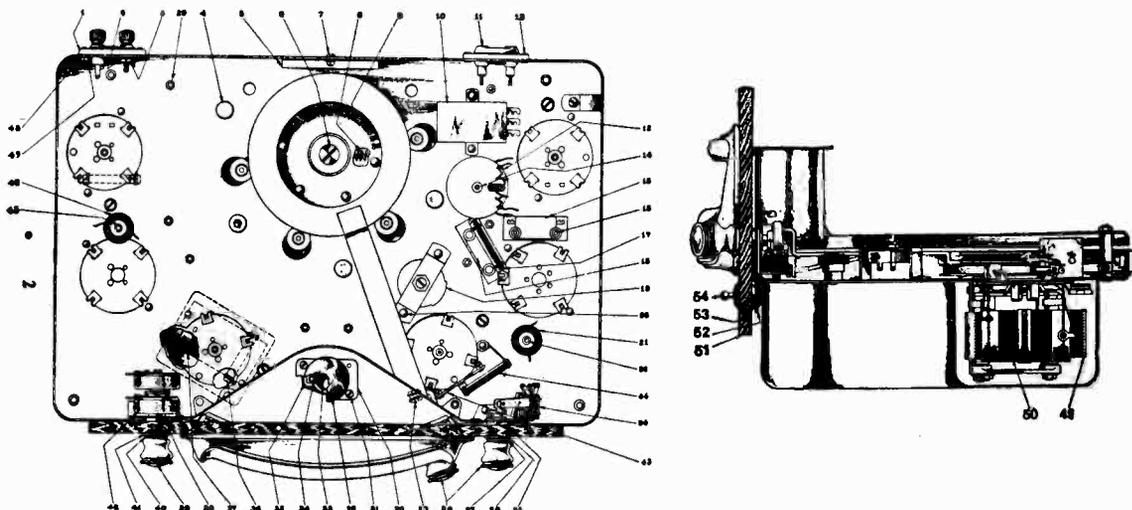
Top and Side Views of Radio with Cover Removed, Showing Parts
